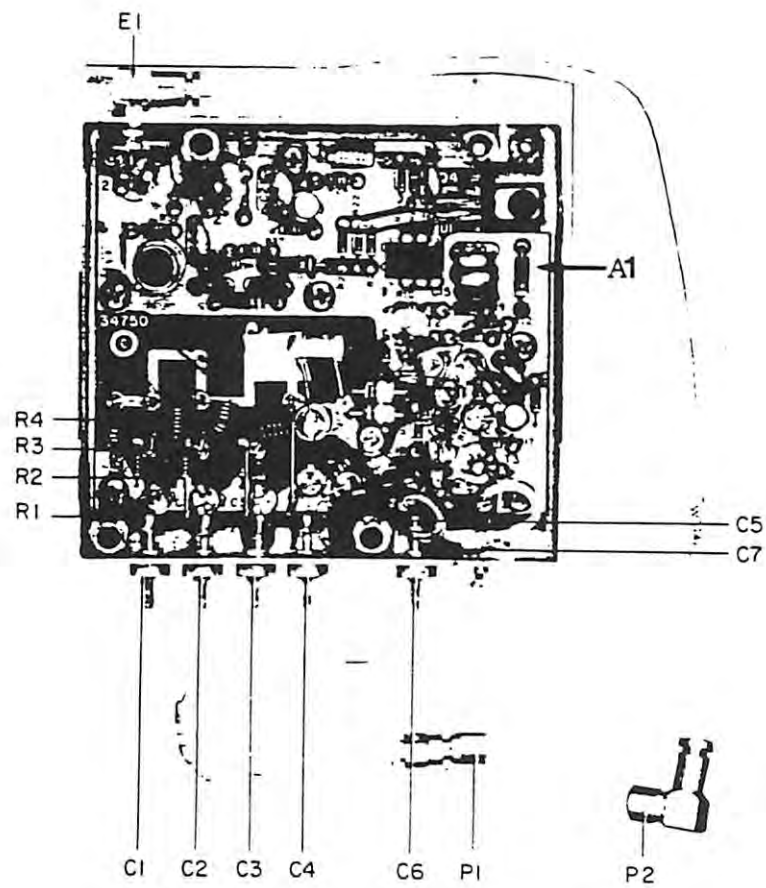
Type 791629 1st LO VCO Assembly (A5A1A1),
